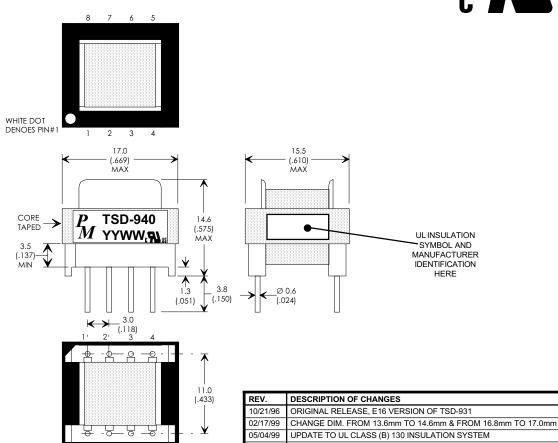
PHYSICAL DIMENSIONS mm (INCHES)
